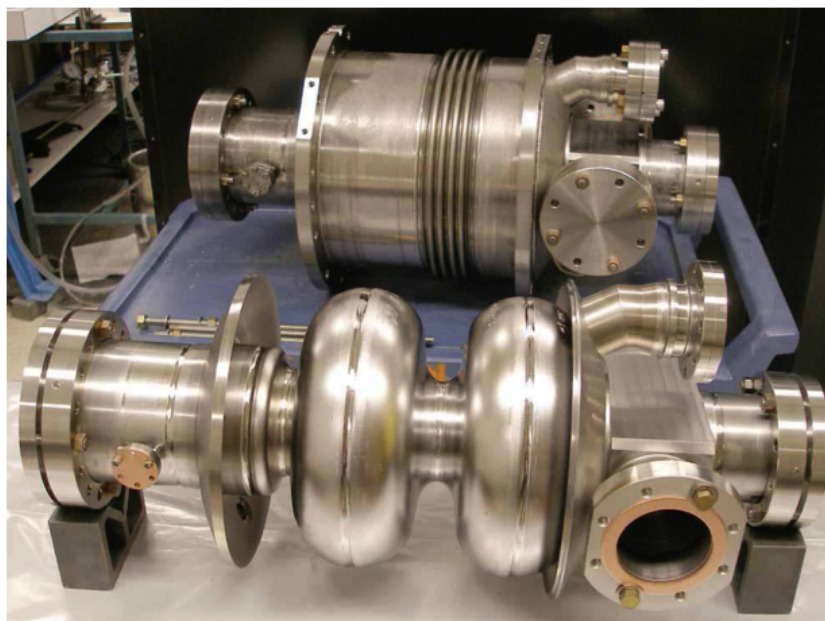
2-cell cavity before and after welding the helium vessel
